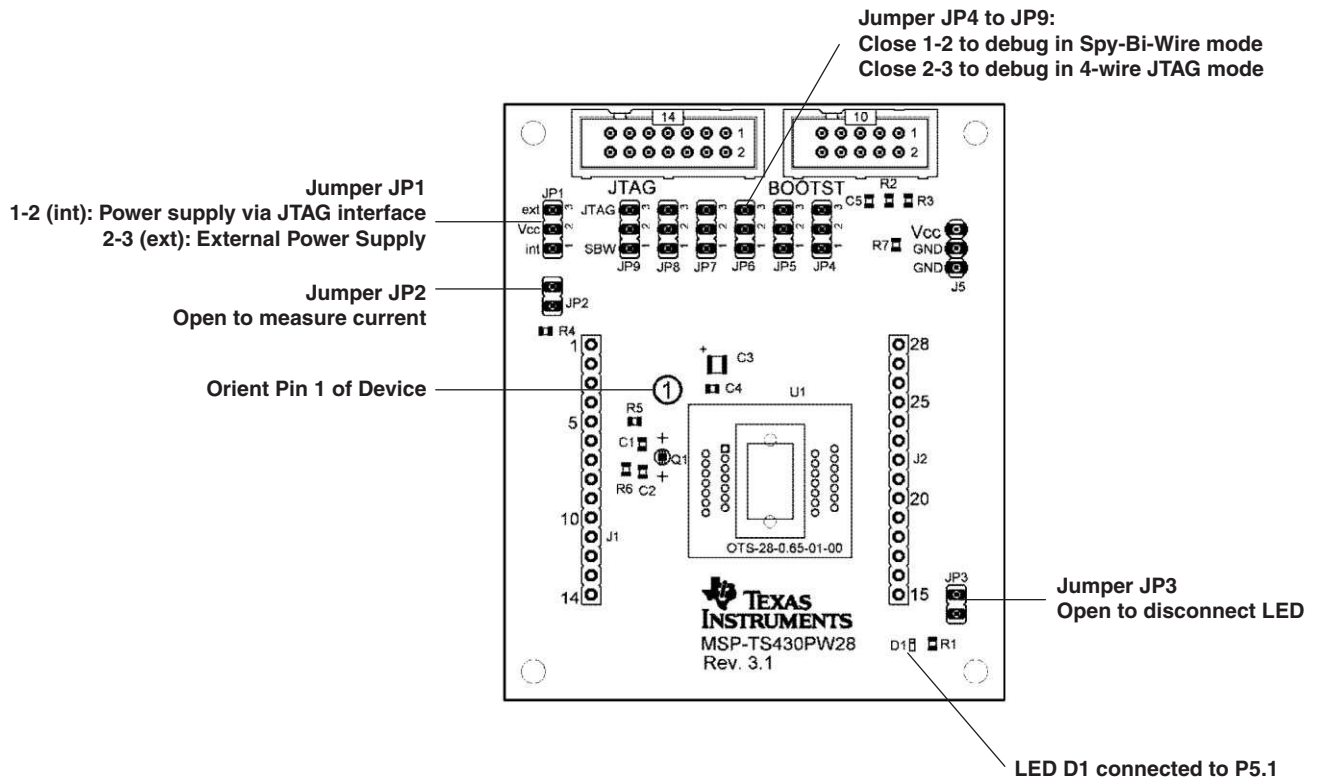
MSP-TS430PW28 Target Socket Module, PCB
